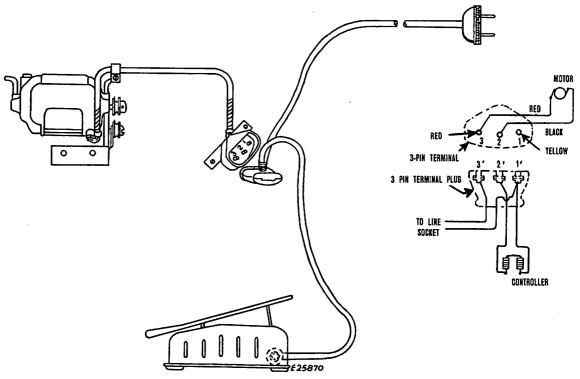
Wiring Diagram for BU207F Motor on 24-63 Machine with Foot Control
